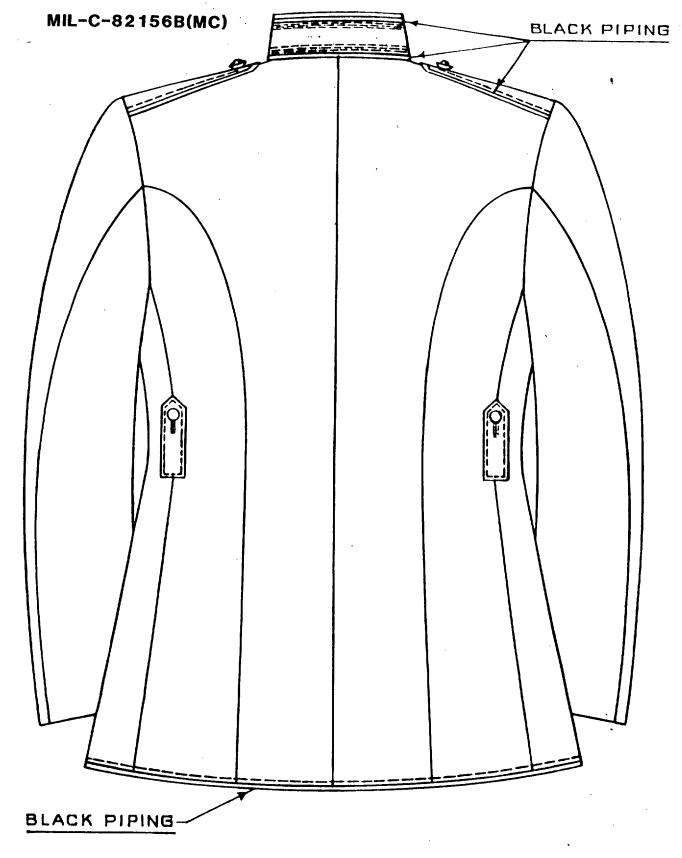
COAT; MAN'S: SCARLET, DRUM AND BUGLECORPS; MUSICIANS
